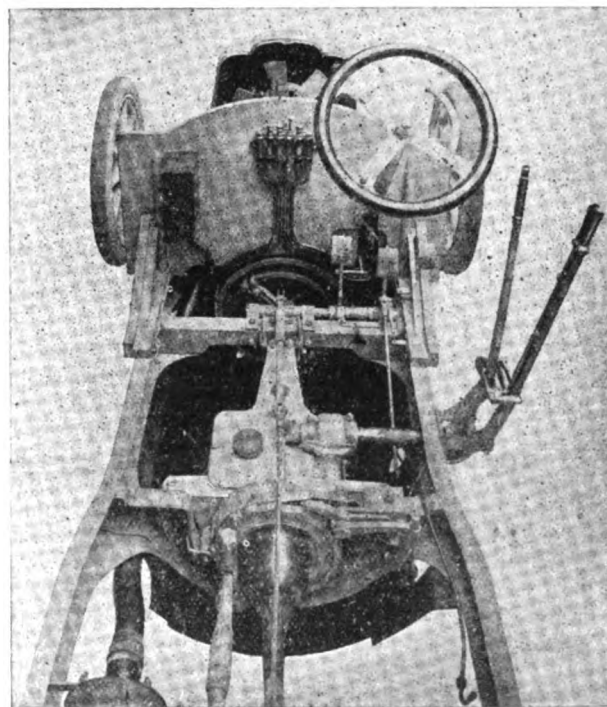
Bird's-eye view of chassis of Mors 15-20-h.p. car from rear.
